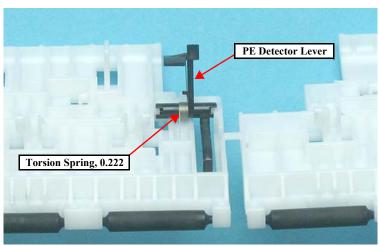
Removing PE Detector and Torsion Spring, 0.222
